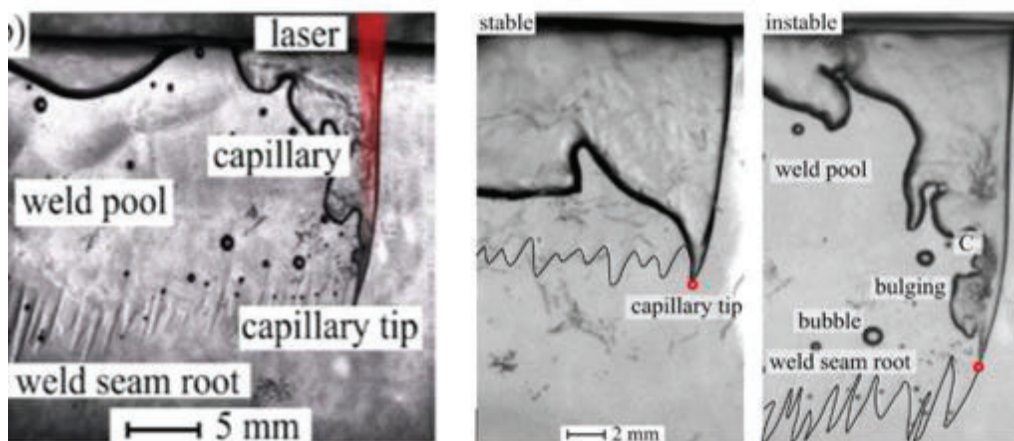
Schematic representation of weld pool and bead formation on the example of keyhole laser welding of ice (Fetzer, 2018).
